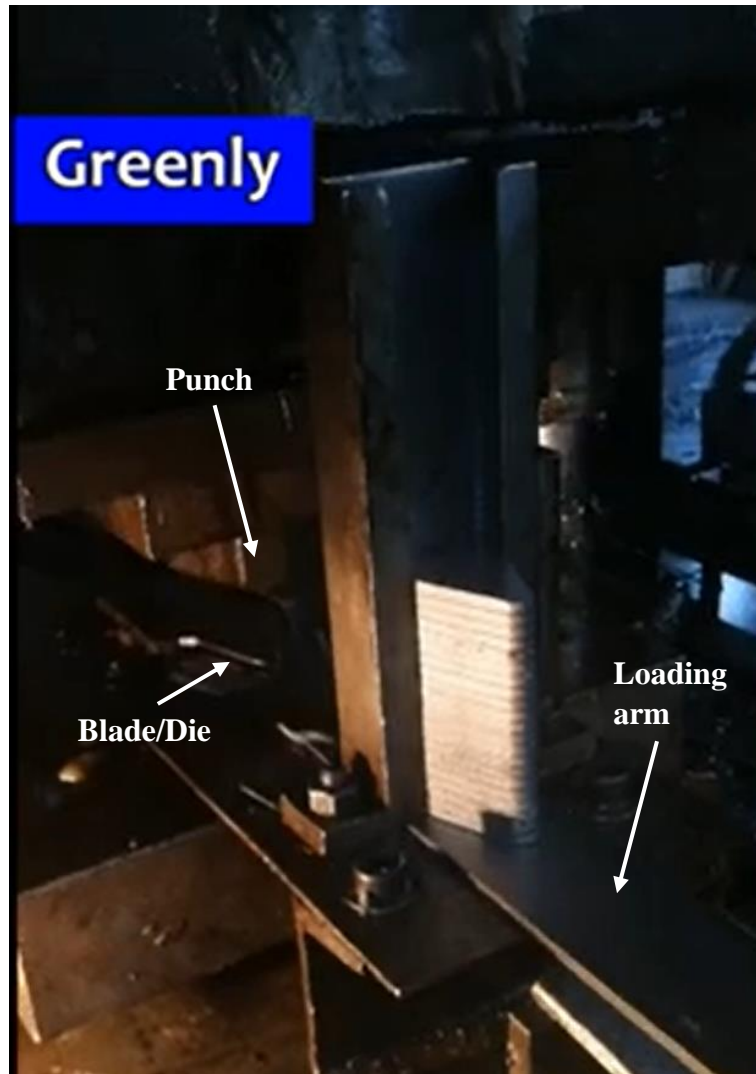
Greenly Machinery combine harvester blade serrated edge forging
